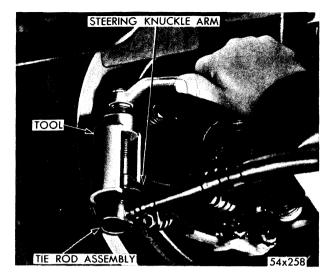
Removing Tie Rod From Steering Knuckle Arm (Tool C-3394)
